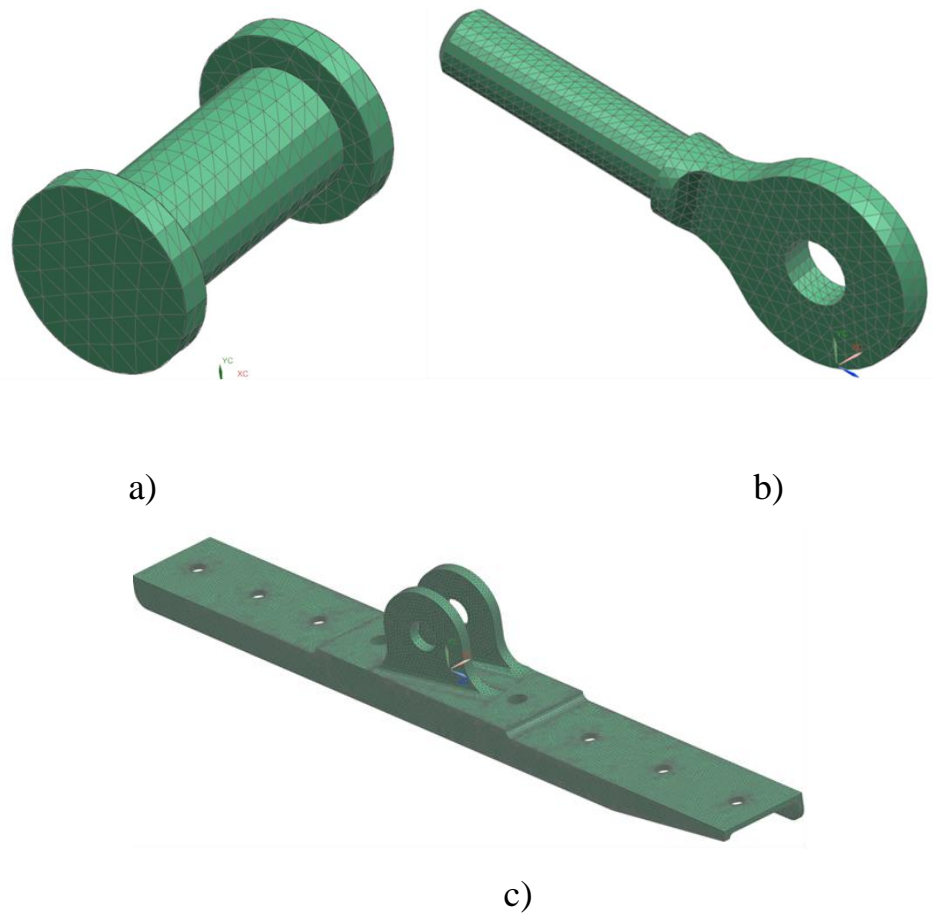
Elements of the assembly unit: bolt (a), tip (b), bracket (c)
